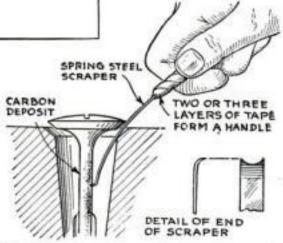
A piece of bent clock spring can be used to remove carbon with valves in place
